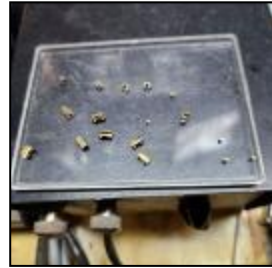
PHOTO ABOVE: A Tray of Hinge Brackets and Shoulders
